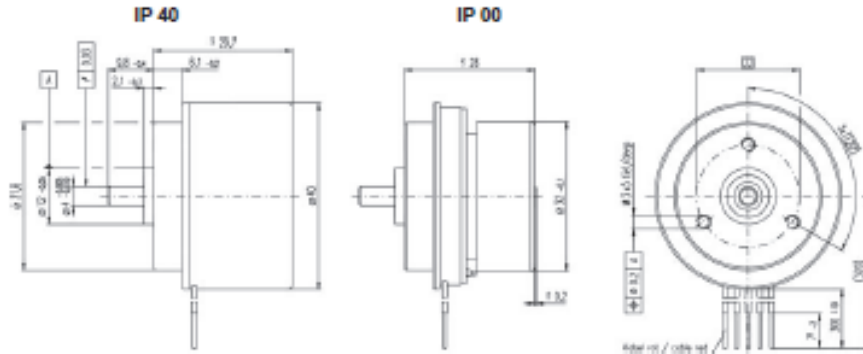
15 Watt Version – Dimensional Drawing [mm]
